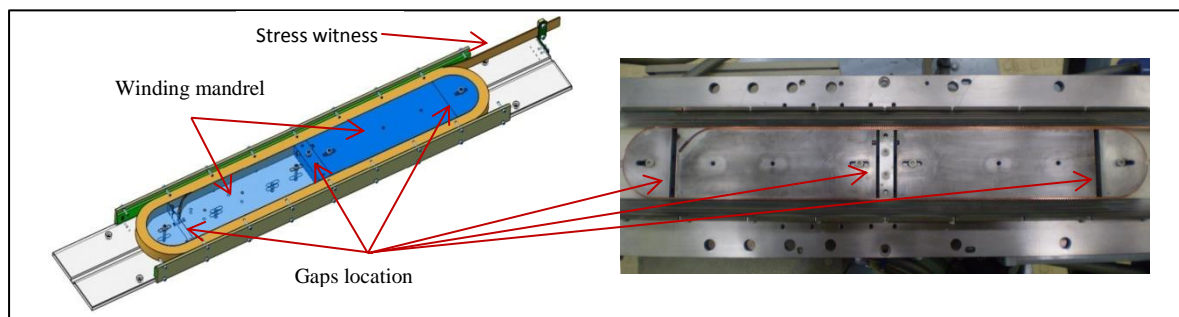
Designed and realized fixture for the dilatation tests.
